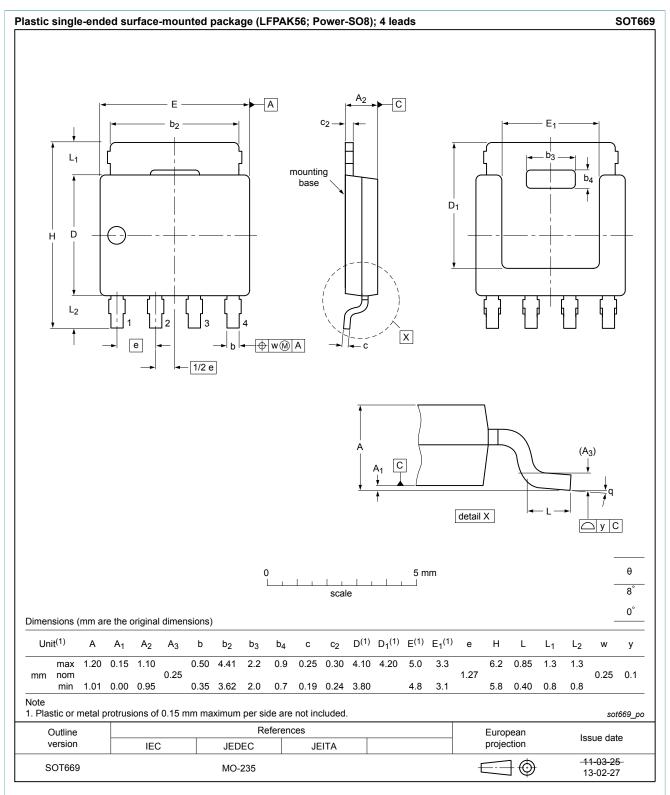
Package outline LFPAK56; Power-SO8 (SOT669)
